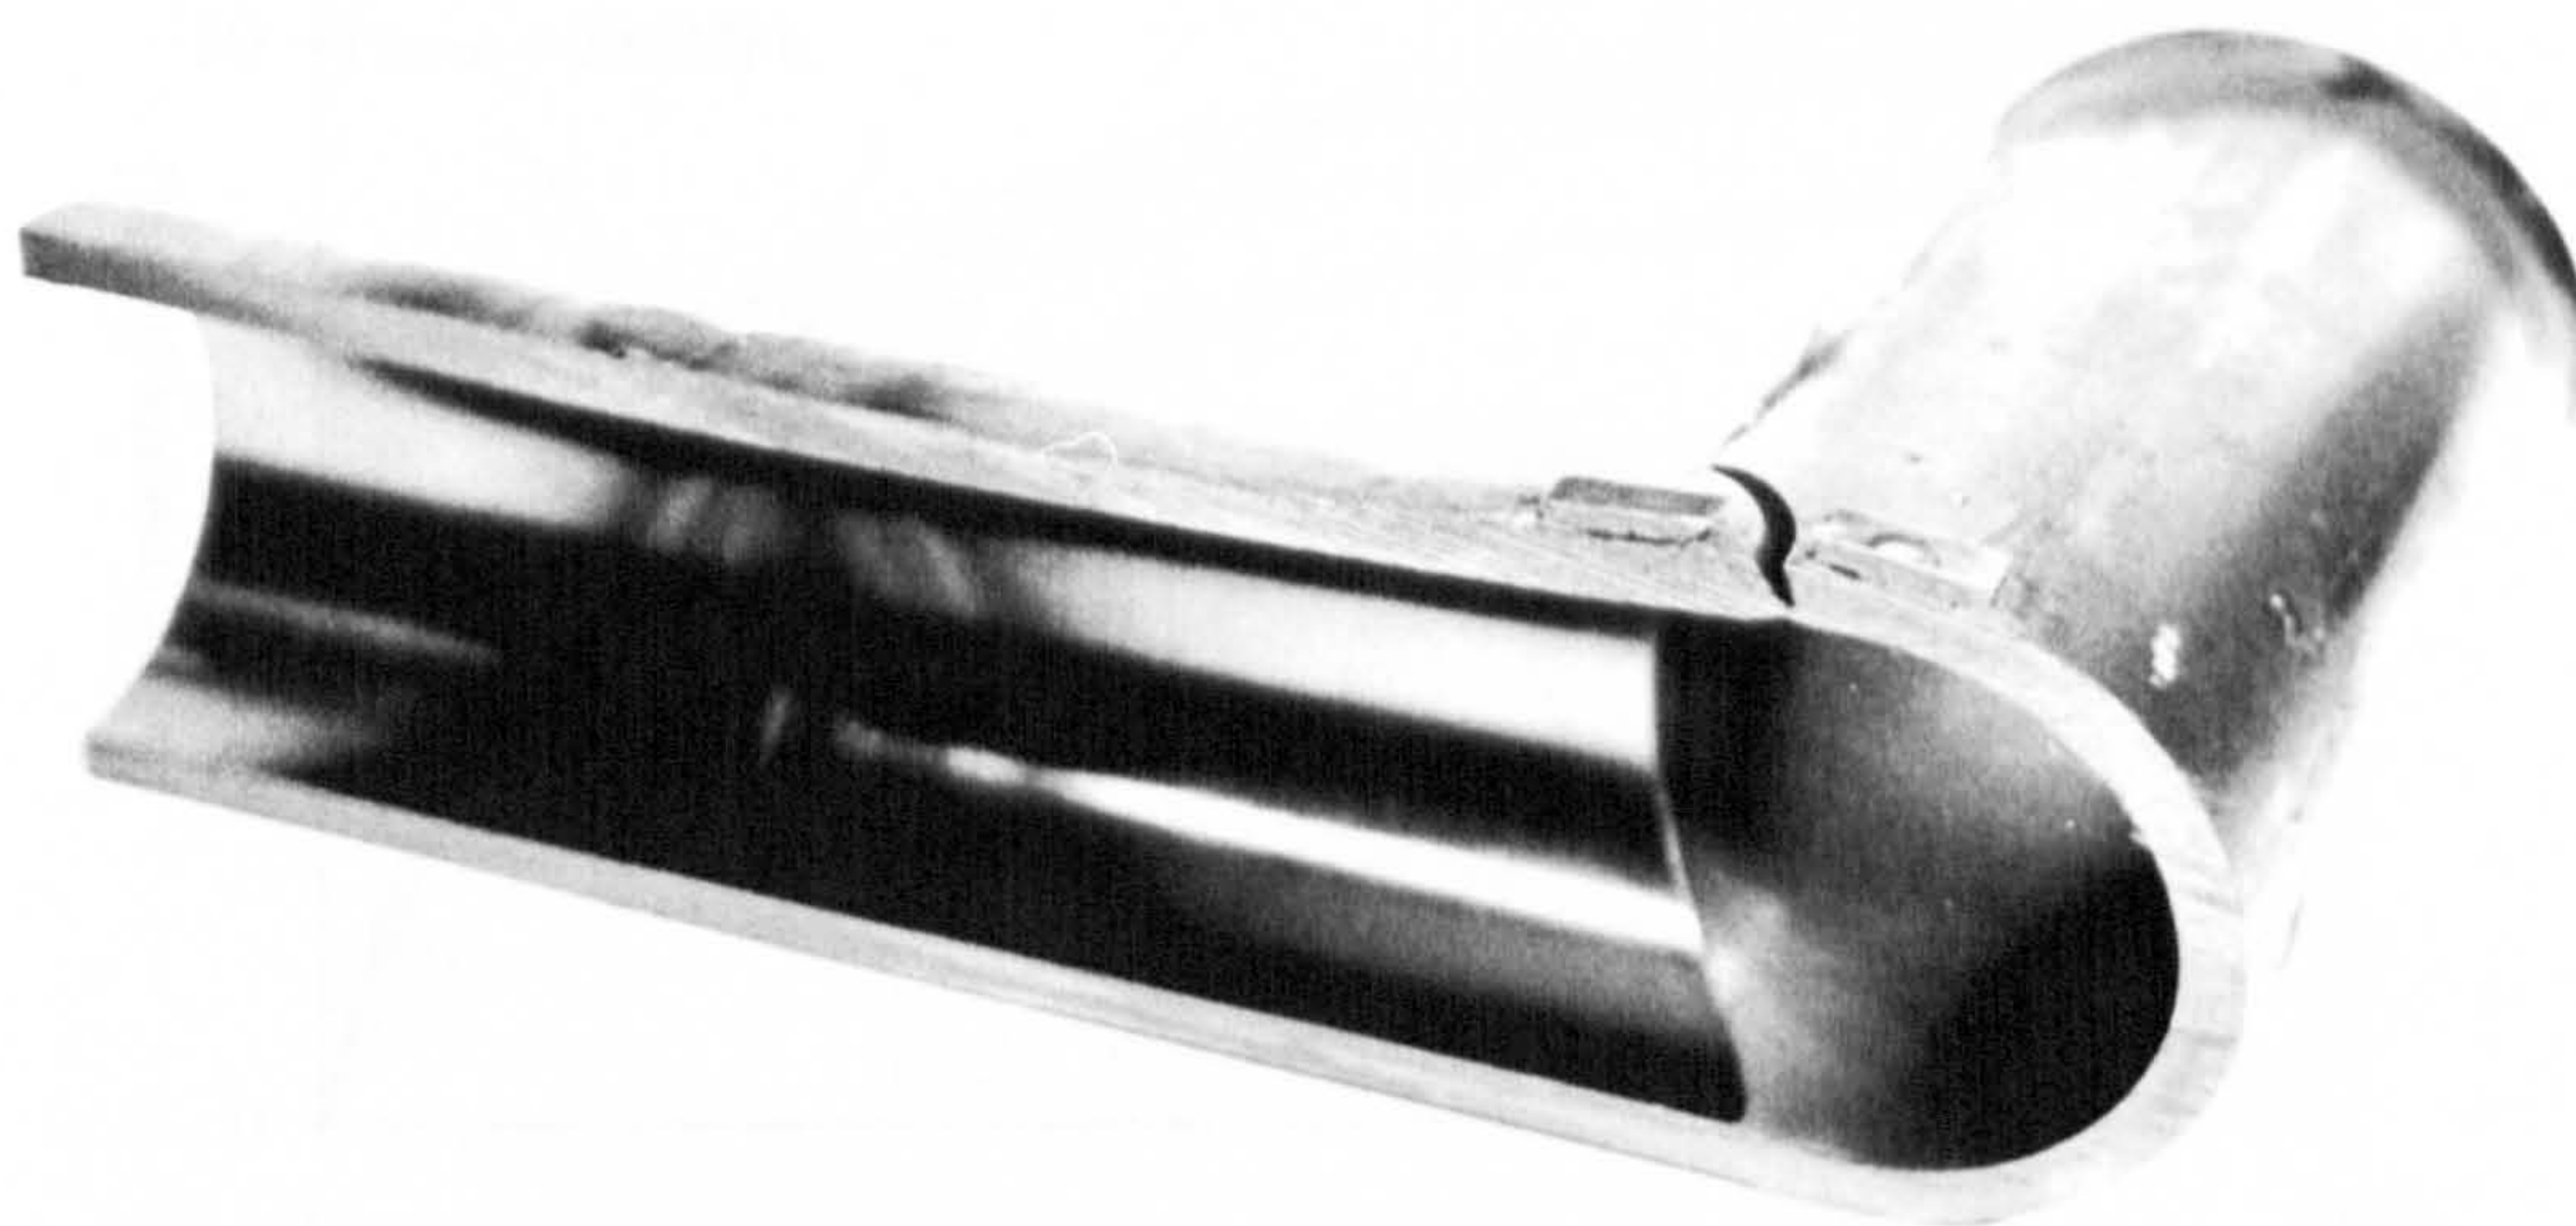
(c) PP Cracked Pressure: Cross-Section of Deformed Junction
